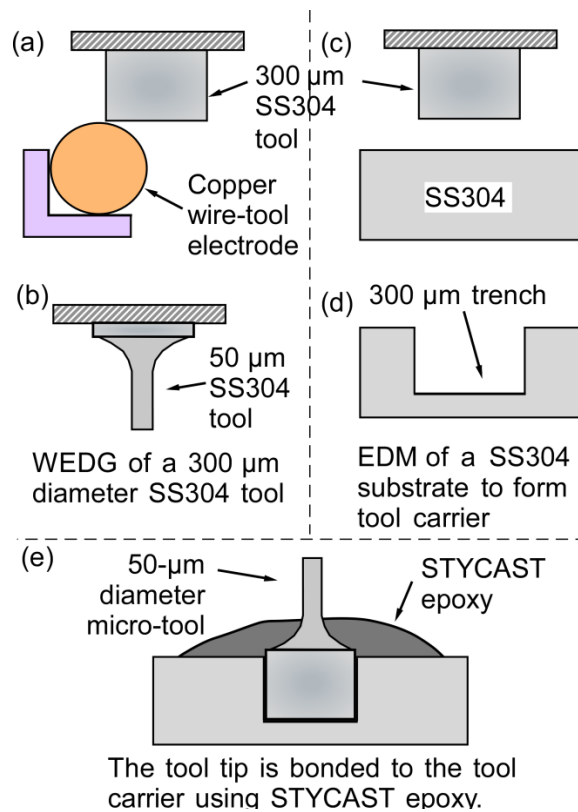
Conceptual diagram of serial mode fabrication of SS304 micro-tool. (a-b) Wire electro-discharge grinding (WEDG) of a 300- μ m diameter stainless steel (SS) tool in order to flatten the tip surface and then reduce the tool diameter. (c-d) Electro-discharge machining (EDM) of a SS substrate to form tool carrier to hold the tool perpendicularly. (e) The tool is inserted into the cavity of the tool carrier and bonded using STYCAST epoxy.
